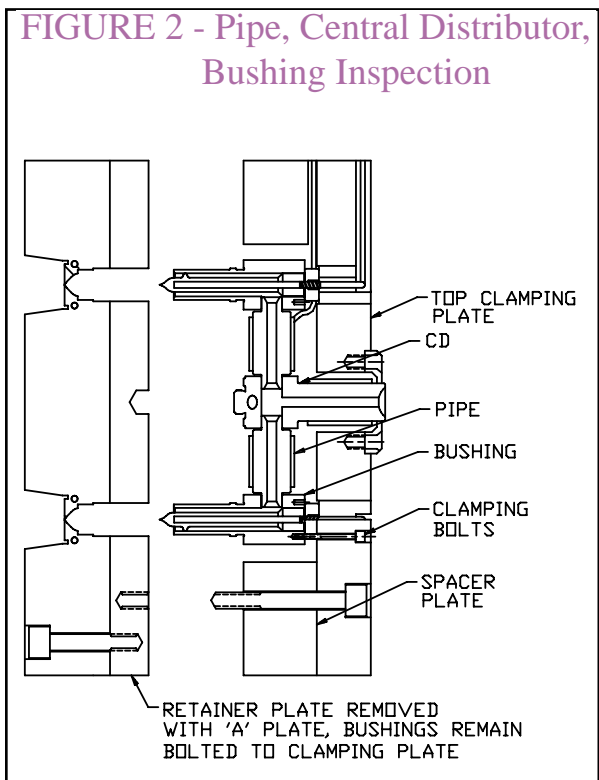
Pipe, Central Distributor, Bushing Inspection
